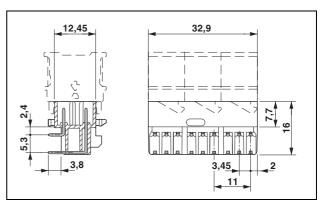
Dimensions of header HSCH 1,5-3U/18 9005
